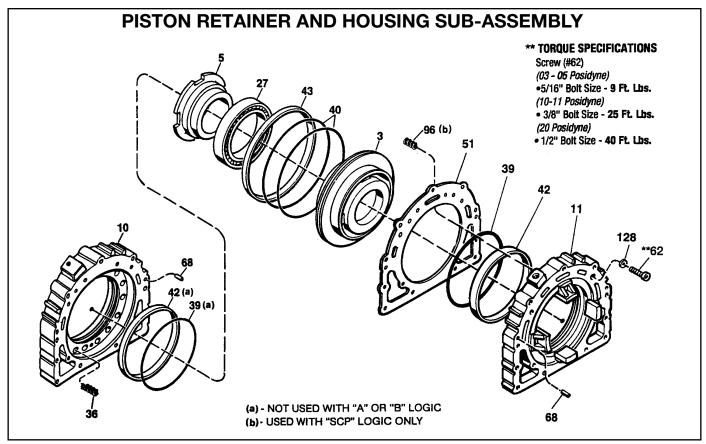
Piston Housing and Retainer Sub-Assembly
